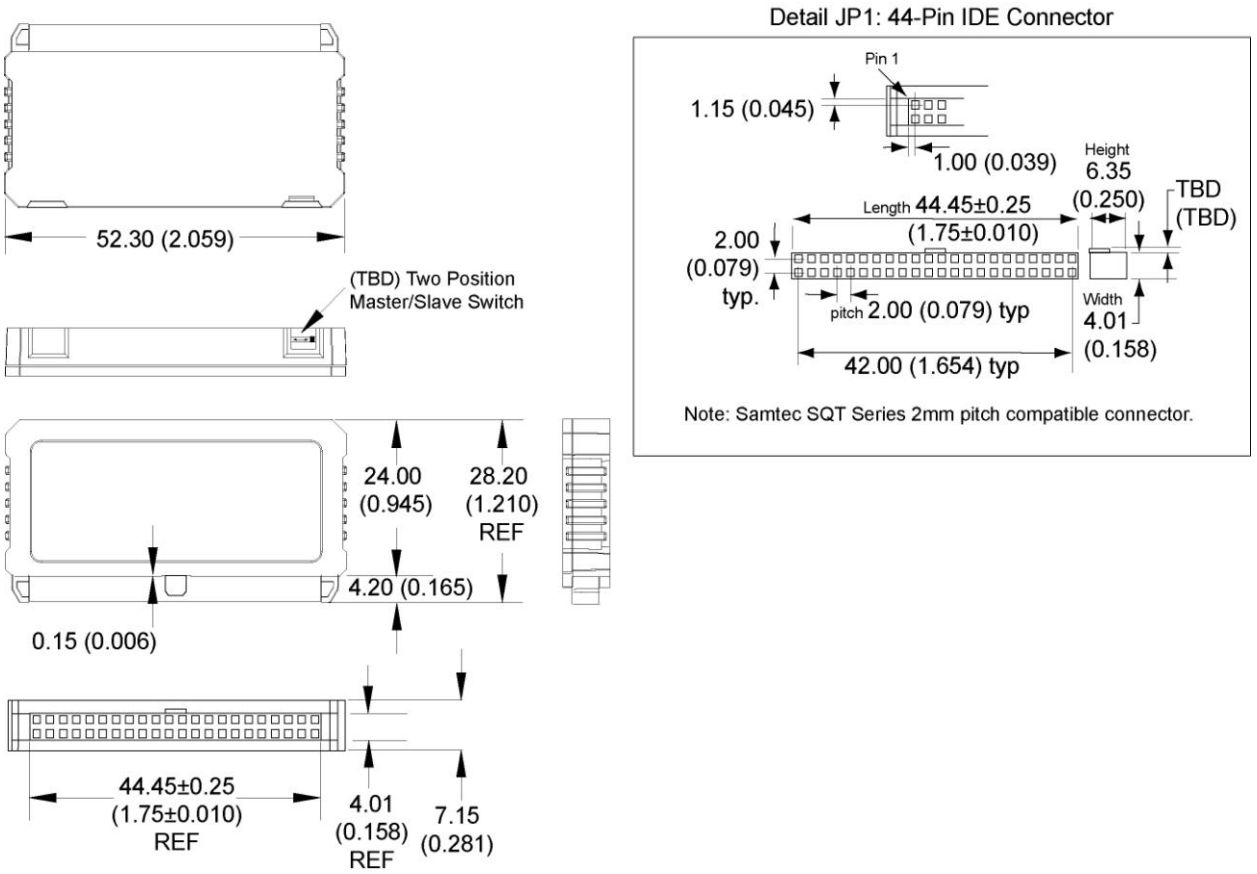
Mechanical dimensions 44-pin horizontal plug-in module
